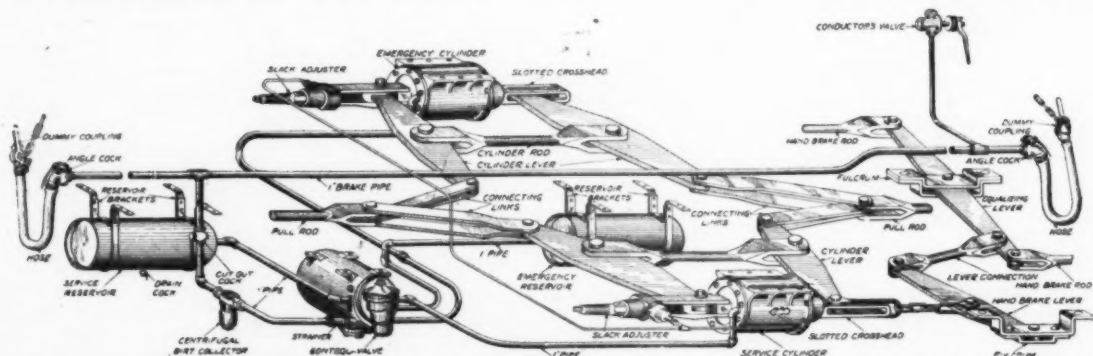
IMPROVED BRAKE EQUIPMENT FOR HEAVY PASSENGER CARS; CONTROL VALVE EQUIPMENT; SCHEDULE "PC"
